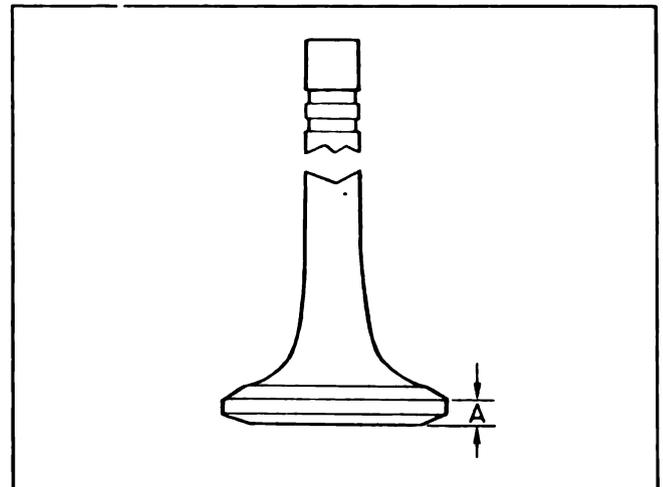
(N10231). The Thickness Of The Valve Head Rim.
